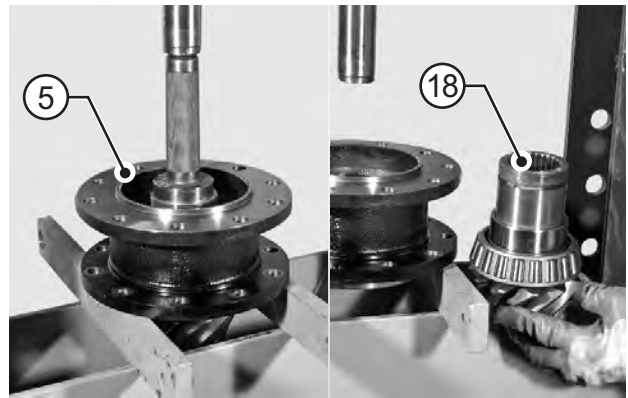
Position the cover under a press, extract the pinion (18) complete with the internal bearing (16), the spacer (15), and shims (14).
